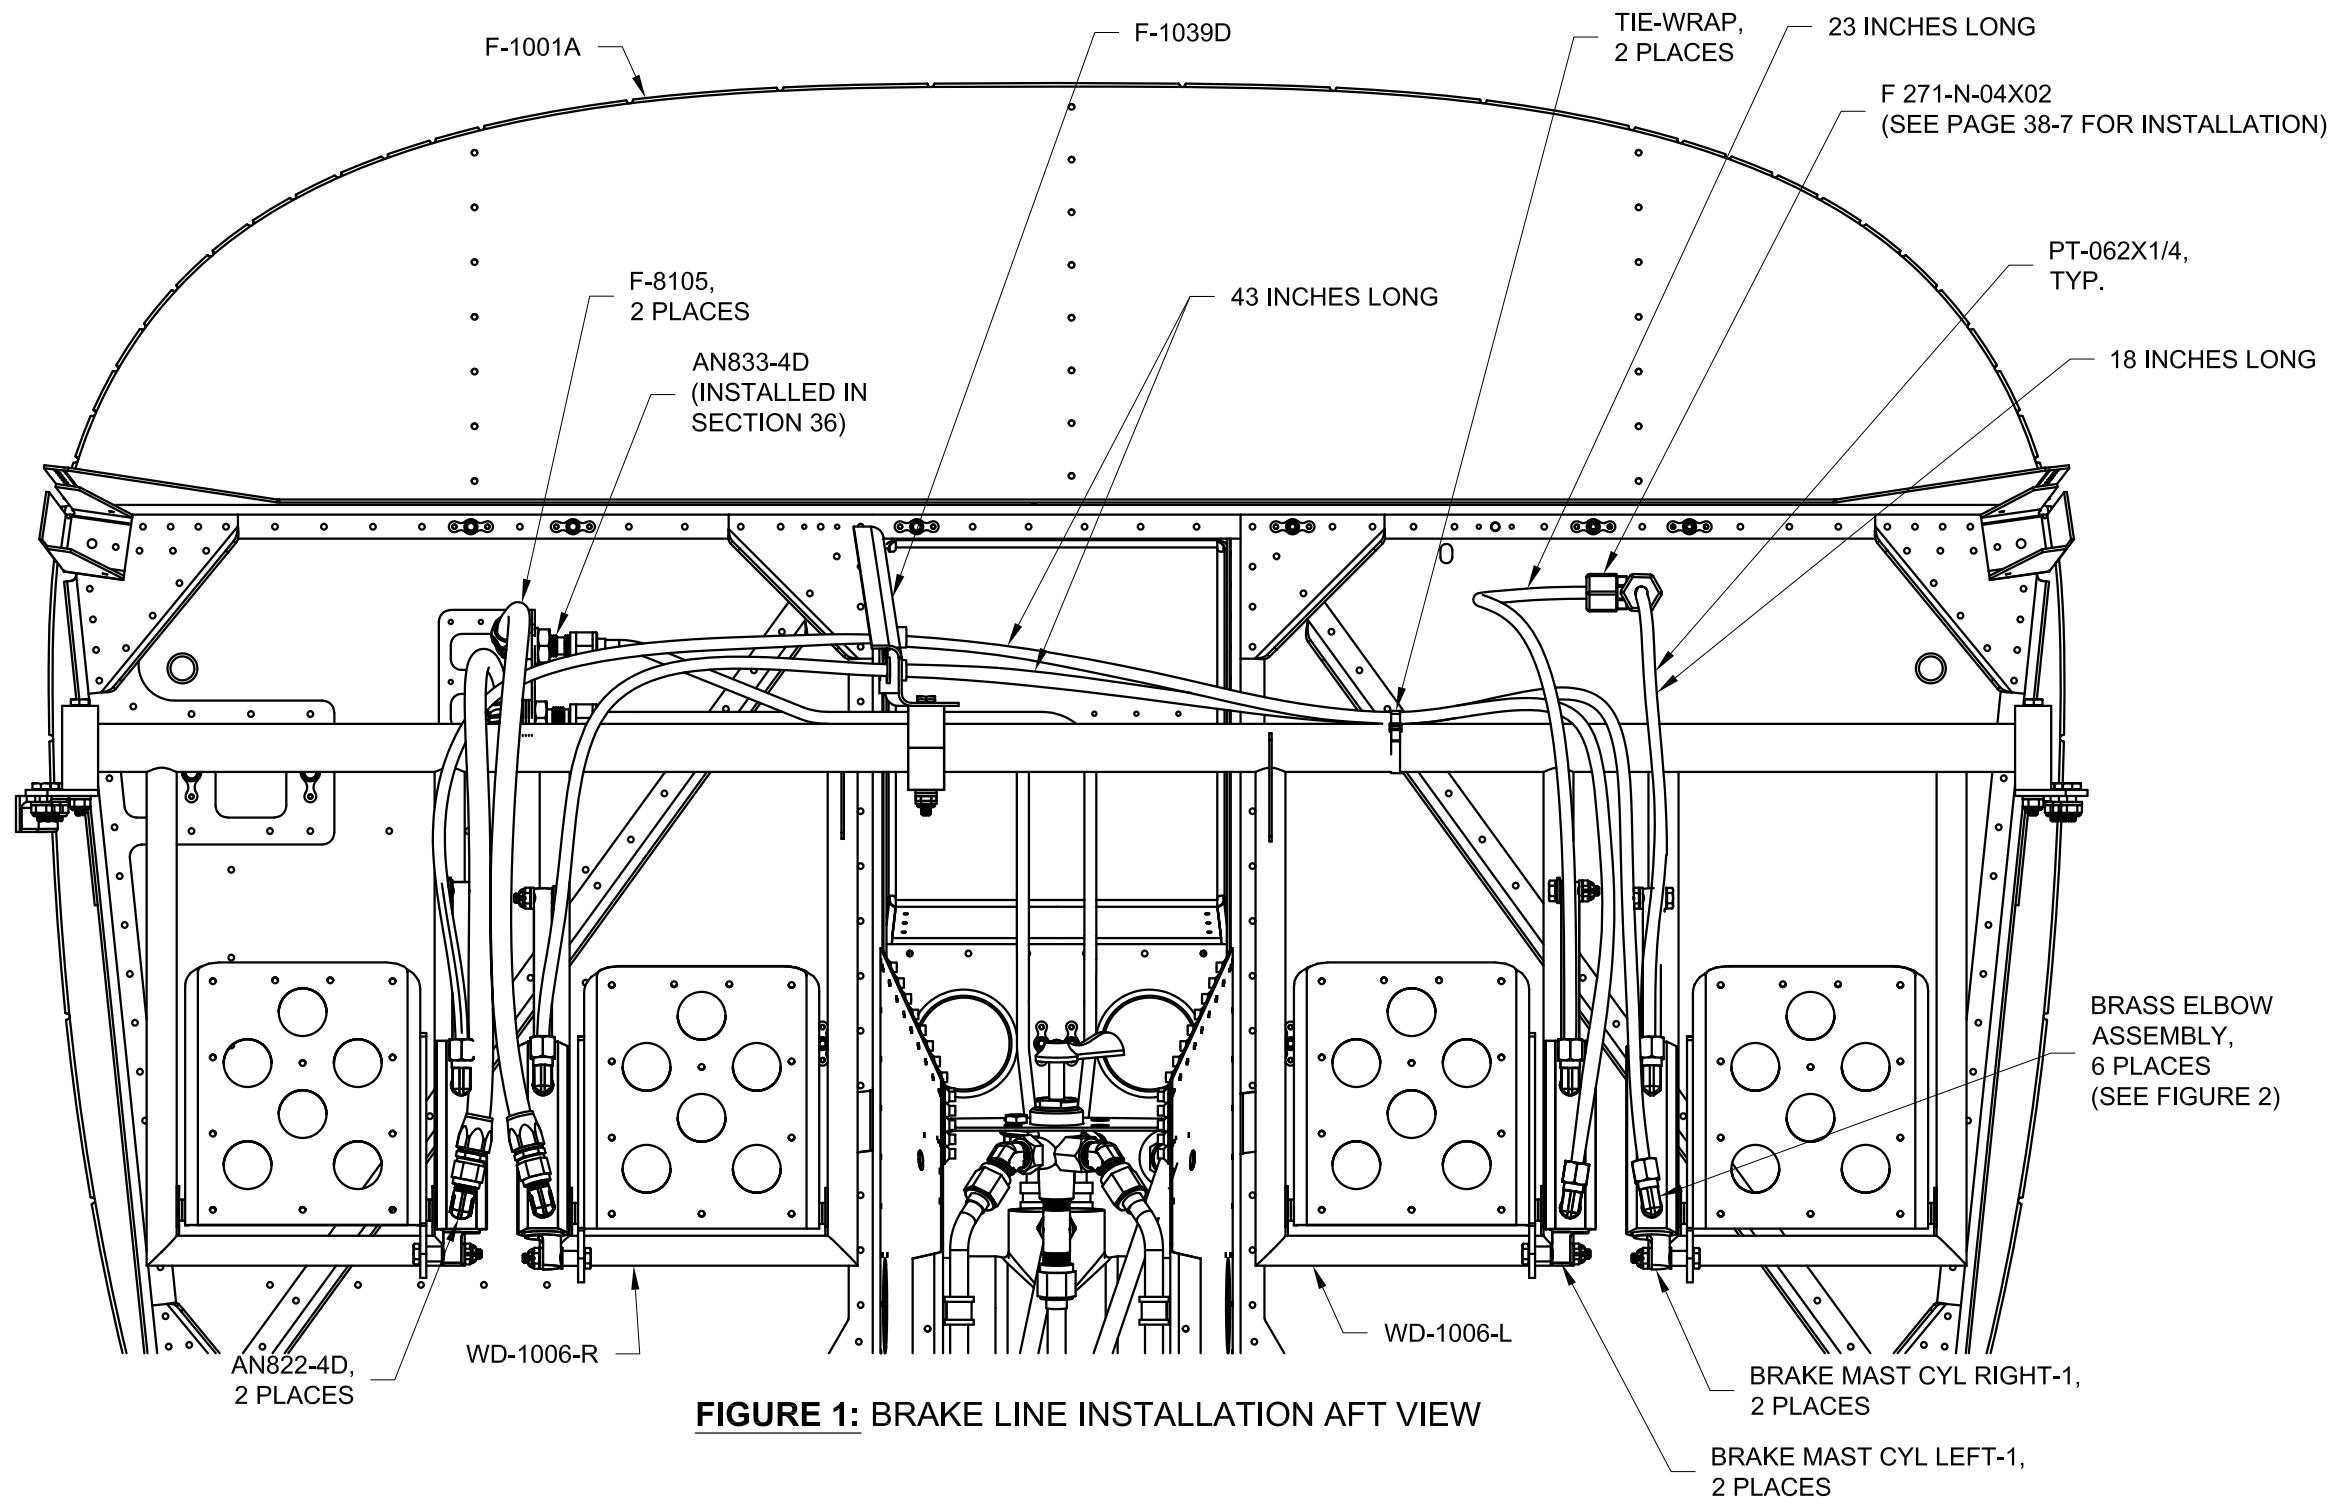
BRAKE LINE INSTALLATION AFT VIEW
